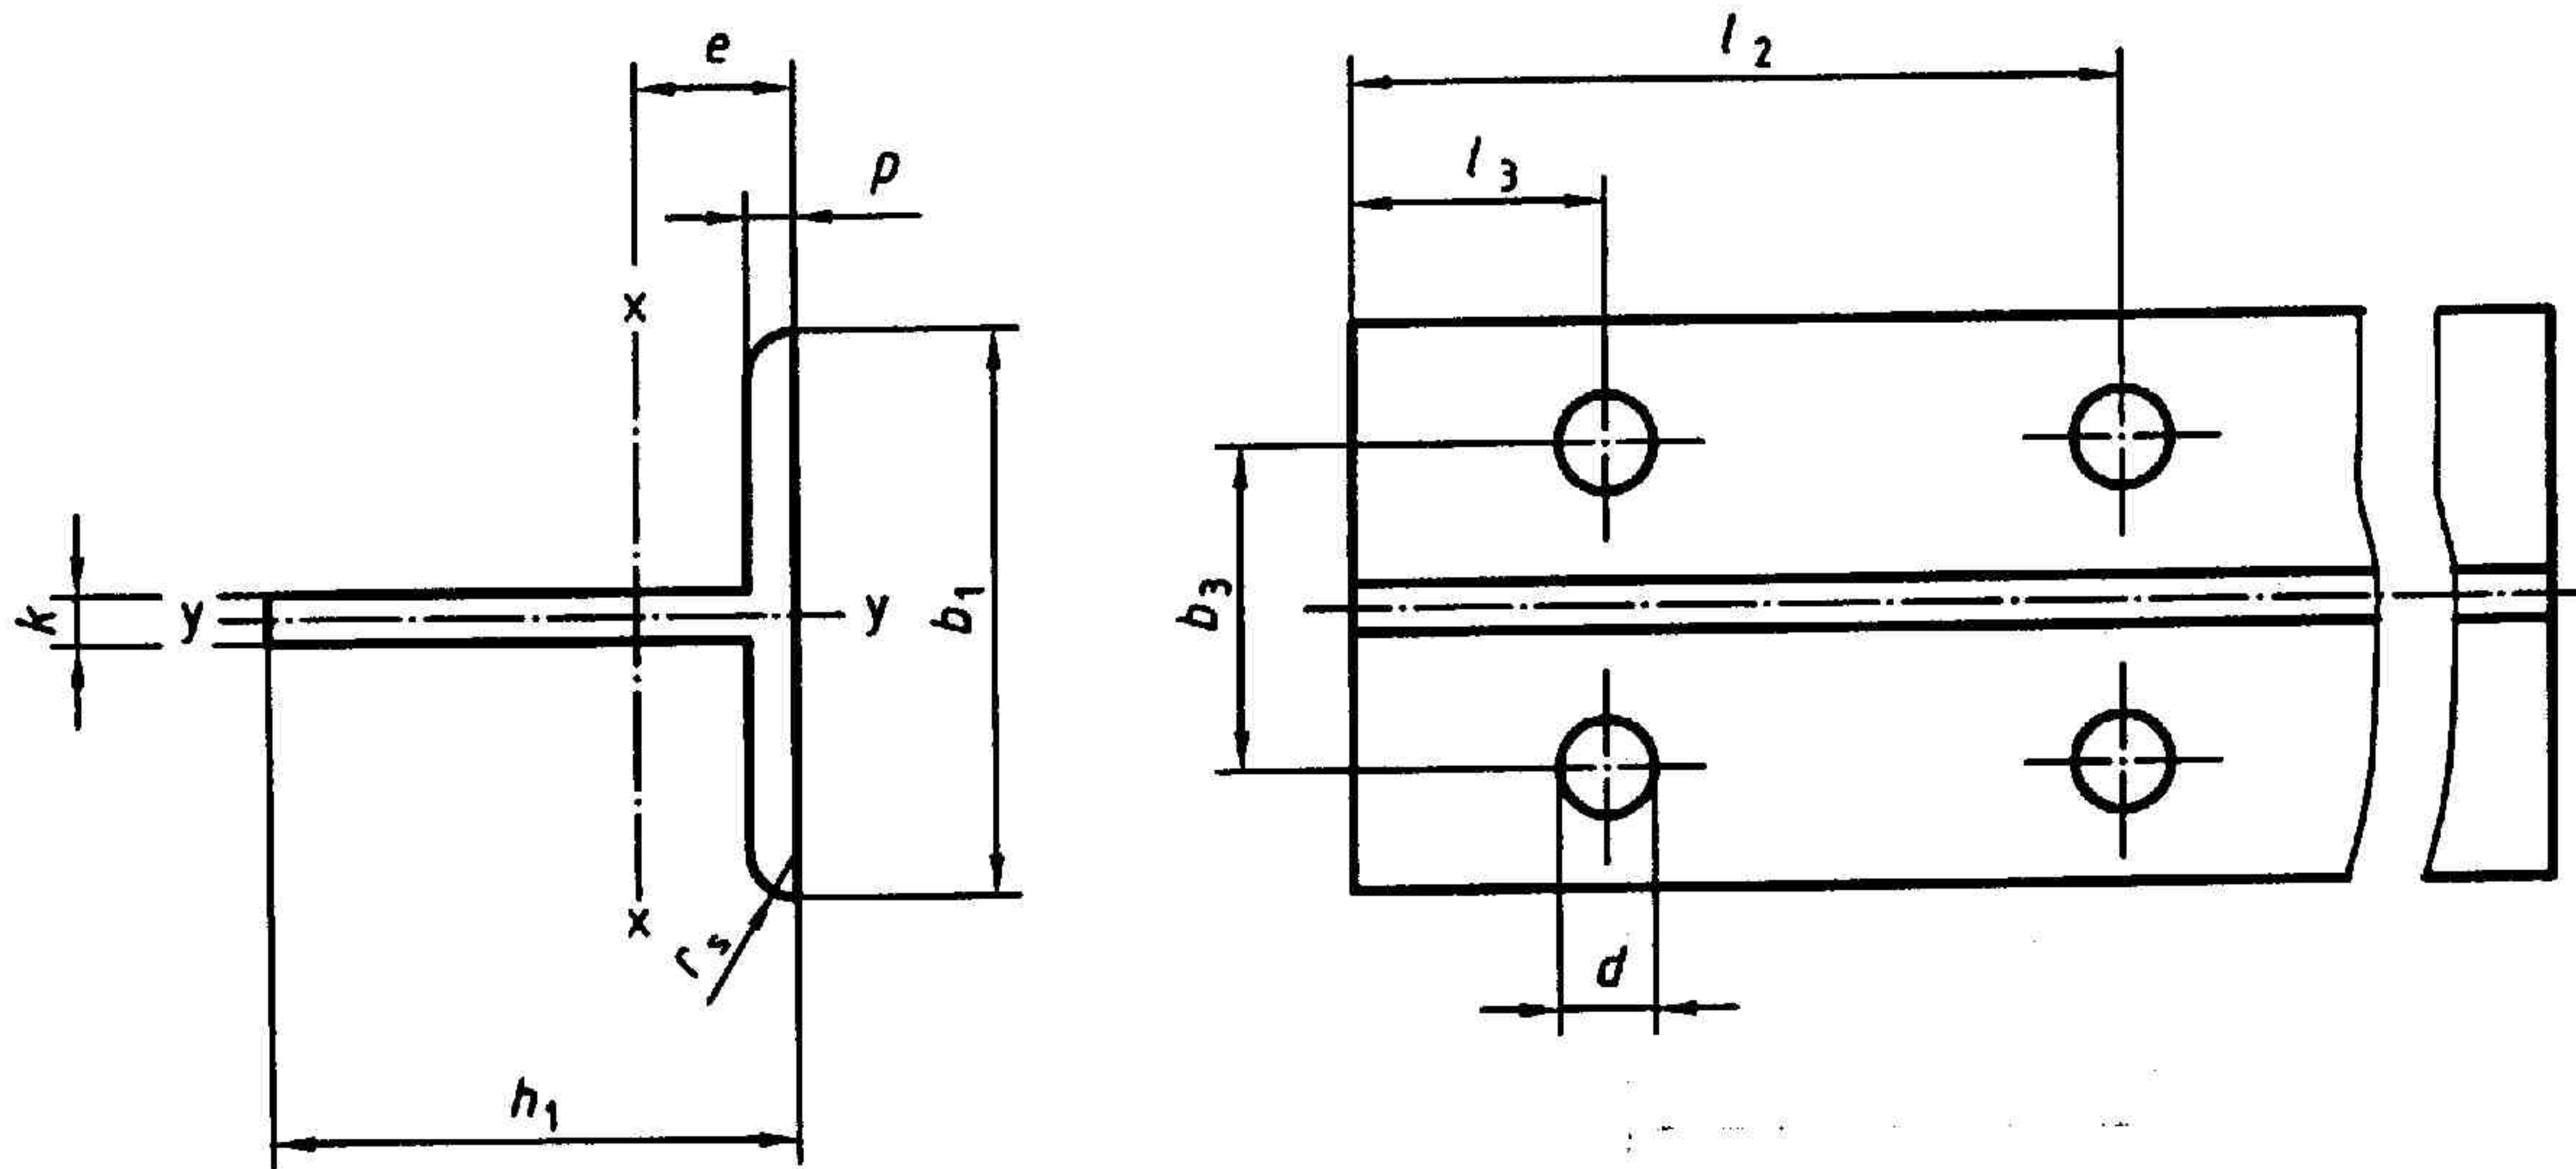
Cold drawn parallel foot and blade flange guide rail
